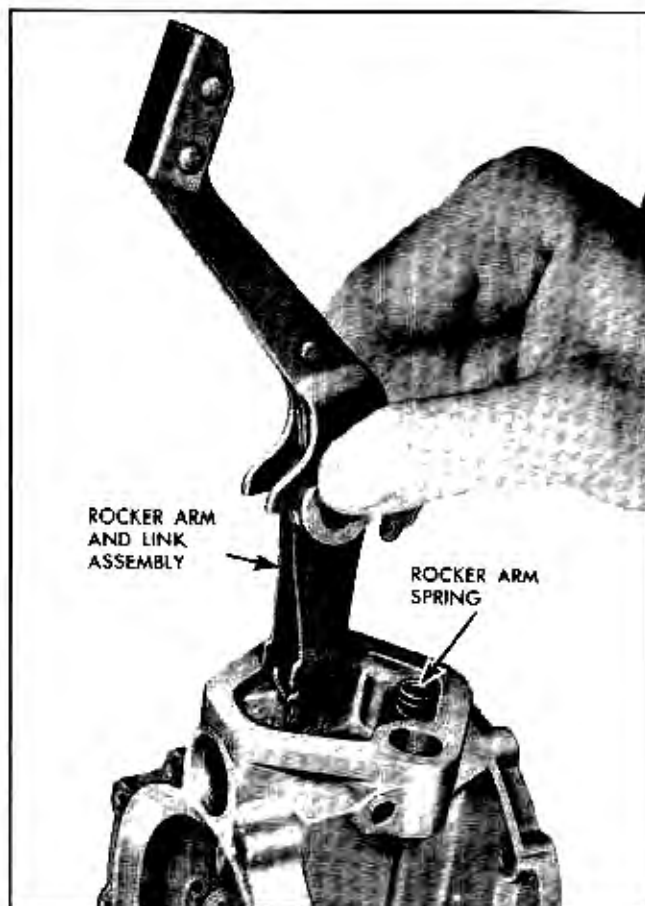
B-102 Installing Rocker Arm and Link Assembly
